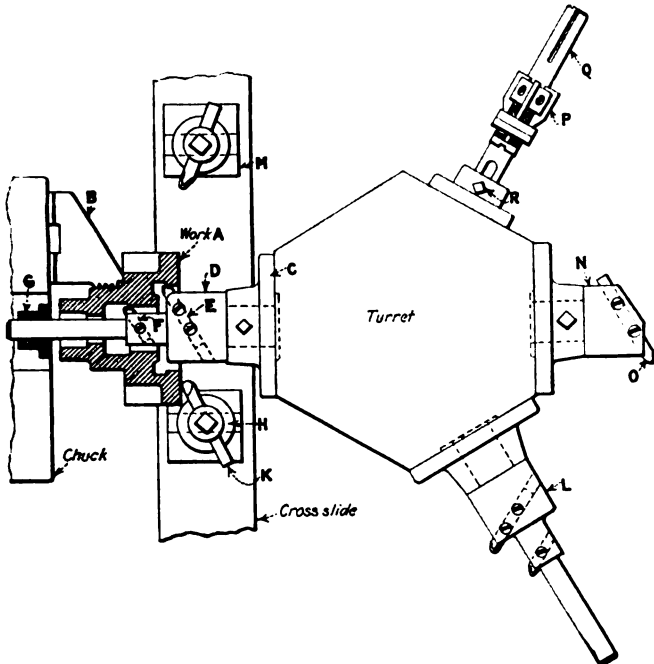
FIRST LAYOUT FOR PART SHOWN IN FIG. 376
